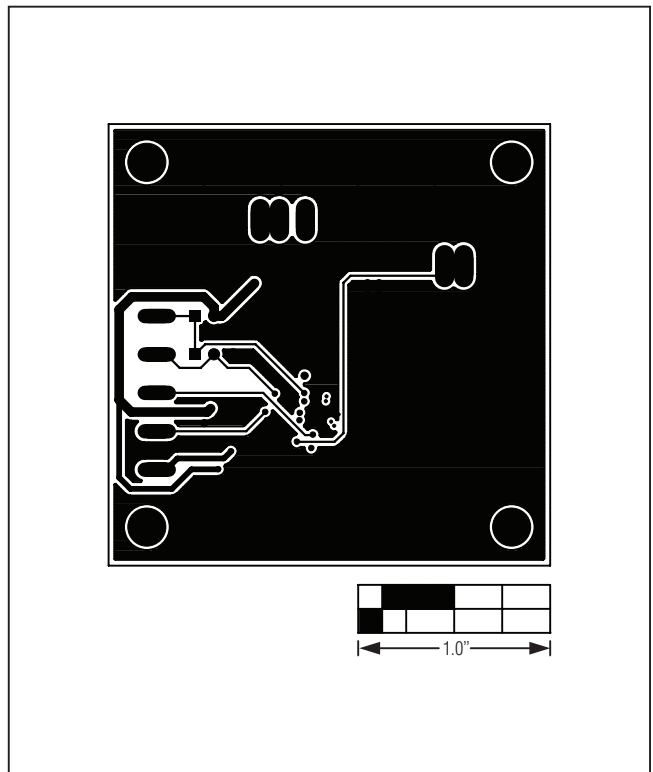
MAX15108 EV Kit PCB Layout—Inner Layer 3
